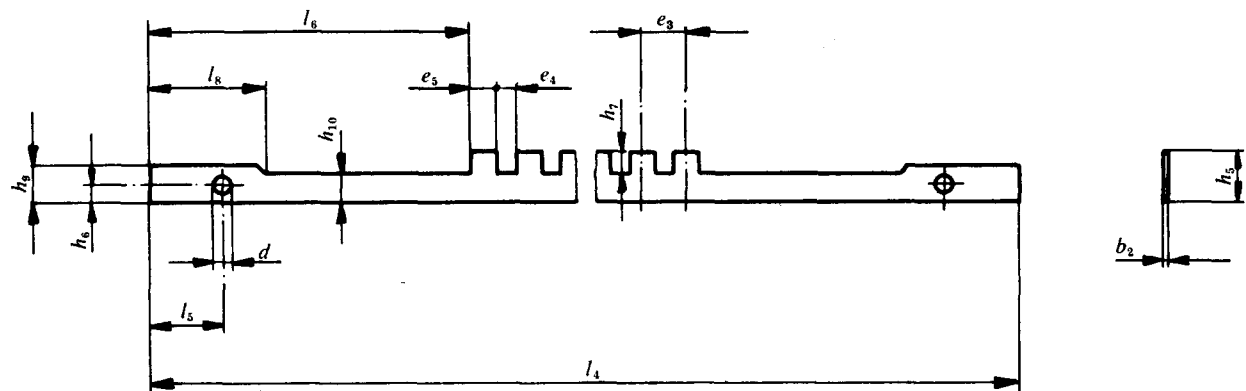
Inner serrated movable bar FIG. 5 — Tringle crénelée intérieure mobile
